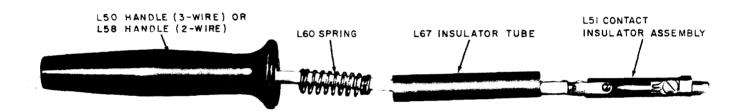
KS-14440 Soldering Copper-Showing Parts in the Handle
